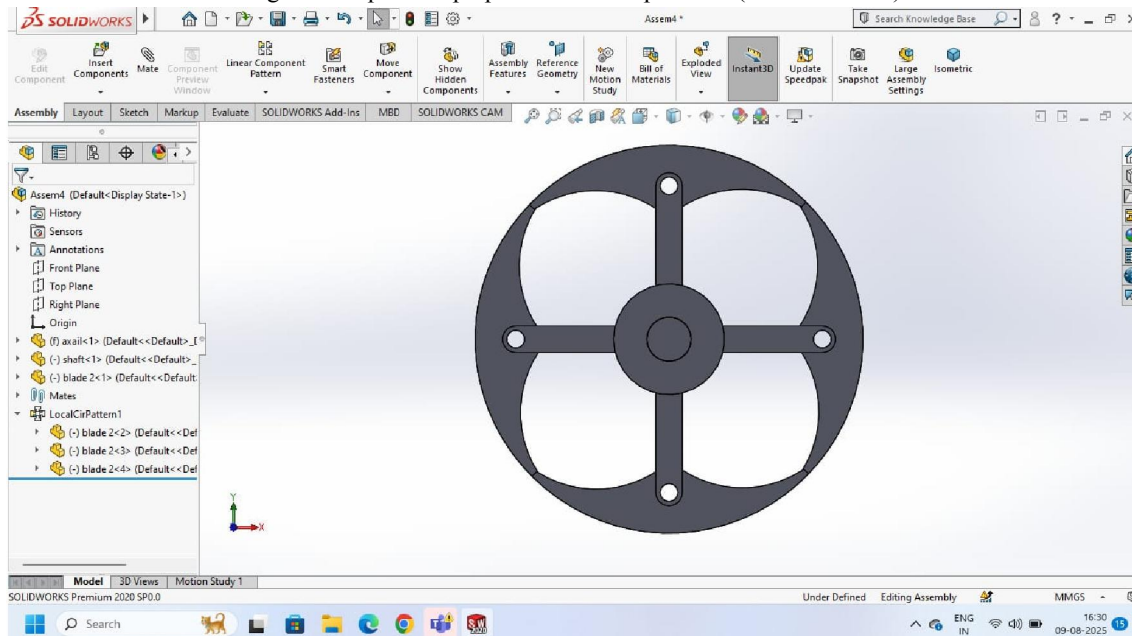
Wheel 2 position 1st Assembly (wheel 2 case 2)
